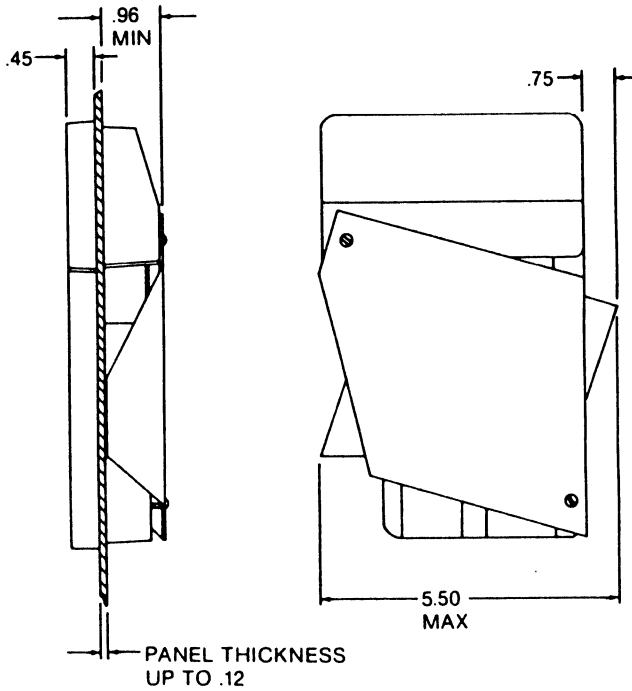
Recessed Mounting Clamp Dimensions. MO/6
